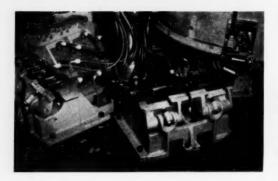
Close-up view of rotary table of grinder showing automatic clamping fixtures mounted thereon for holding plow shares during grinding
